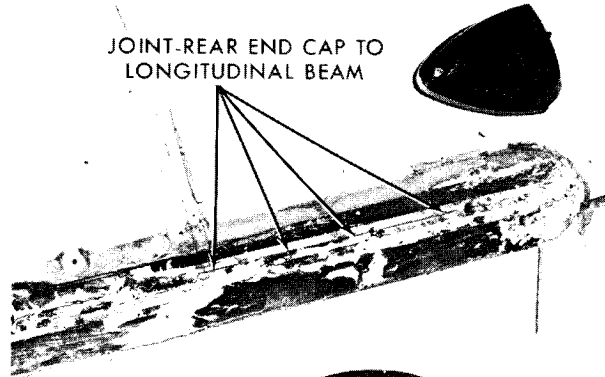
UPPER LONGITUDINAL BEAM REAR JOINT TO END CAP
